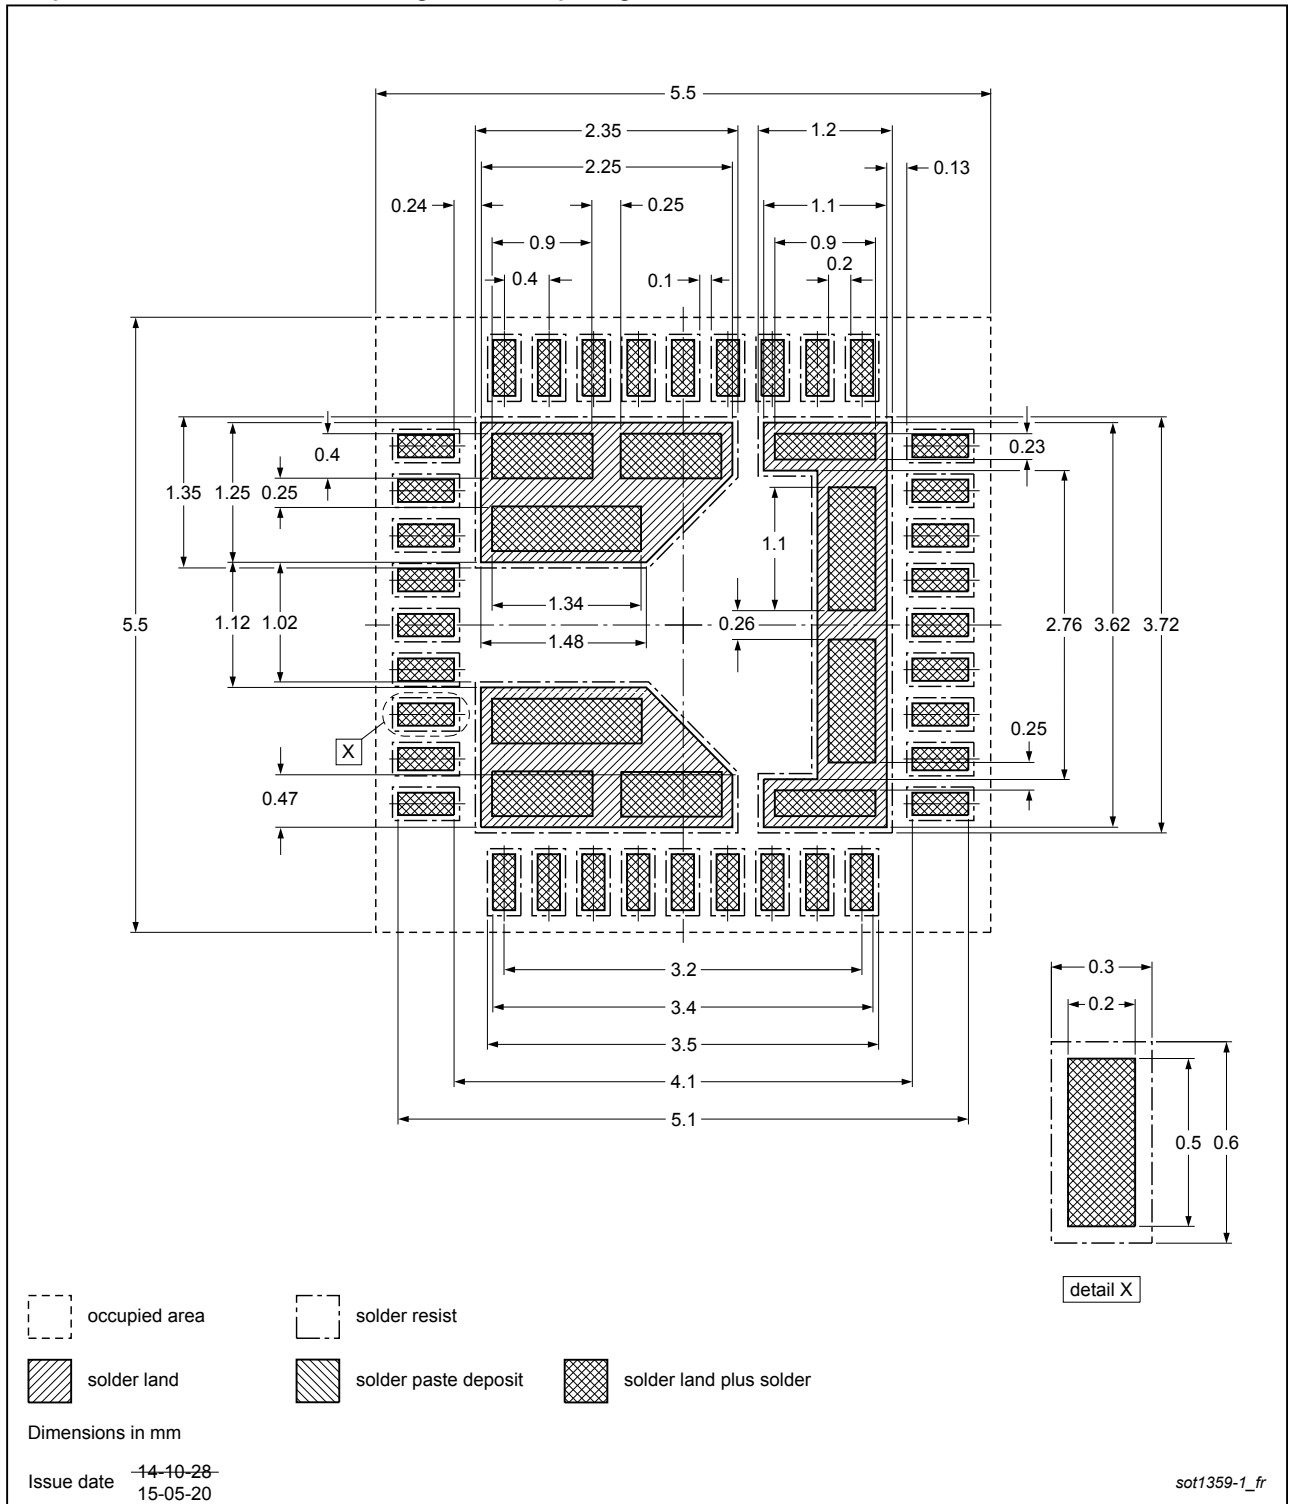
Reflow soldering footprint for HVLGA36 (SOT1359-1)
